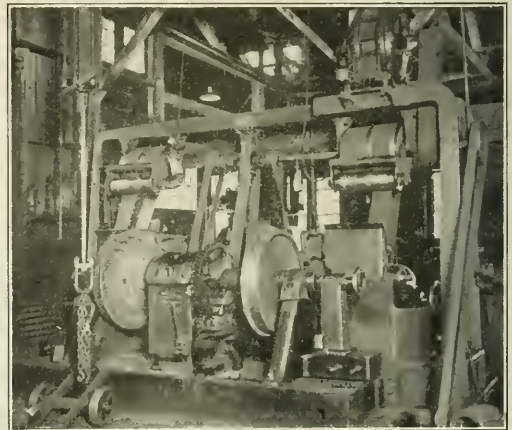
Car Wheel Grinder Used at Huntington Shops
